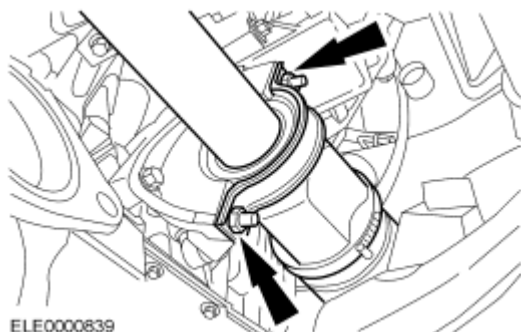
Locating Intermediate Shaft Bearing Bracket Nuts
